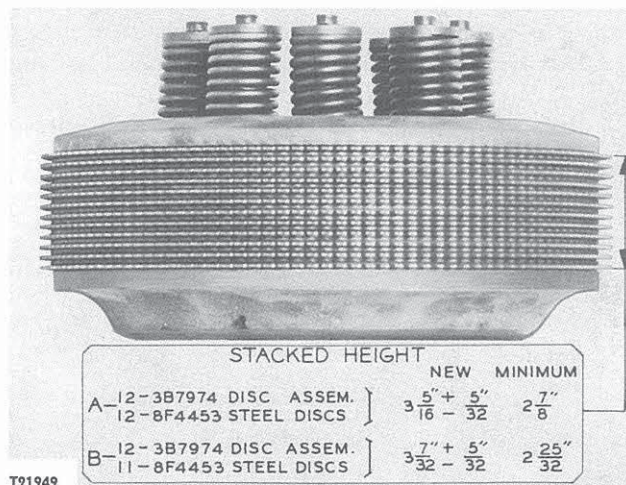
Stacked height dimensions of the 11 steel discs and 12 steel disc clutch assemblies. Removal of one steel disc does not affect clutch capacity.
